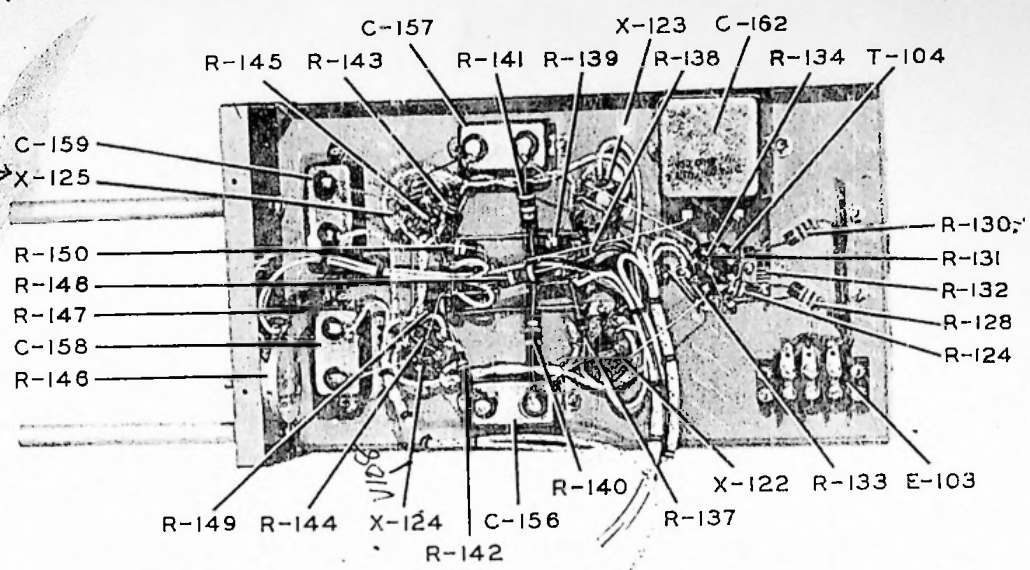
Audio Chassis Parts Arrangement, Bottom View
